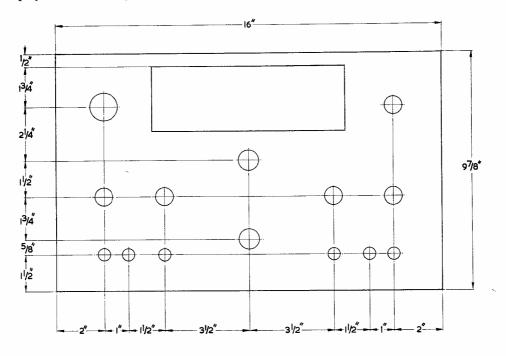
Front panel drilling dimensions. A template is provided with the dial
